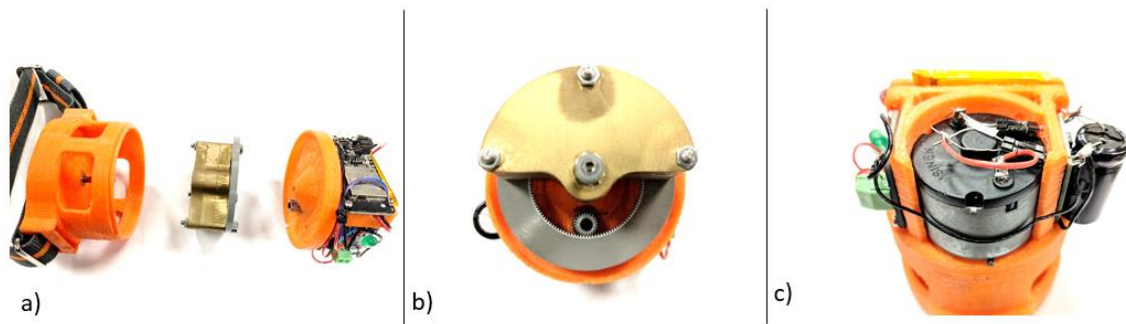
Photographs of the prototype energy harvester - (a) Disassembled system showing the main body, mechanical system, and end cap with electrical system, (b) Planetary gear train with accompanying rotary pendulum, and (c) End cap with integrated DC generator, electronics module, and instrumentation system
